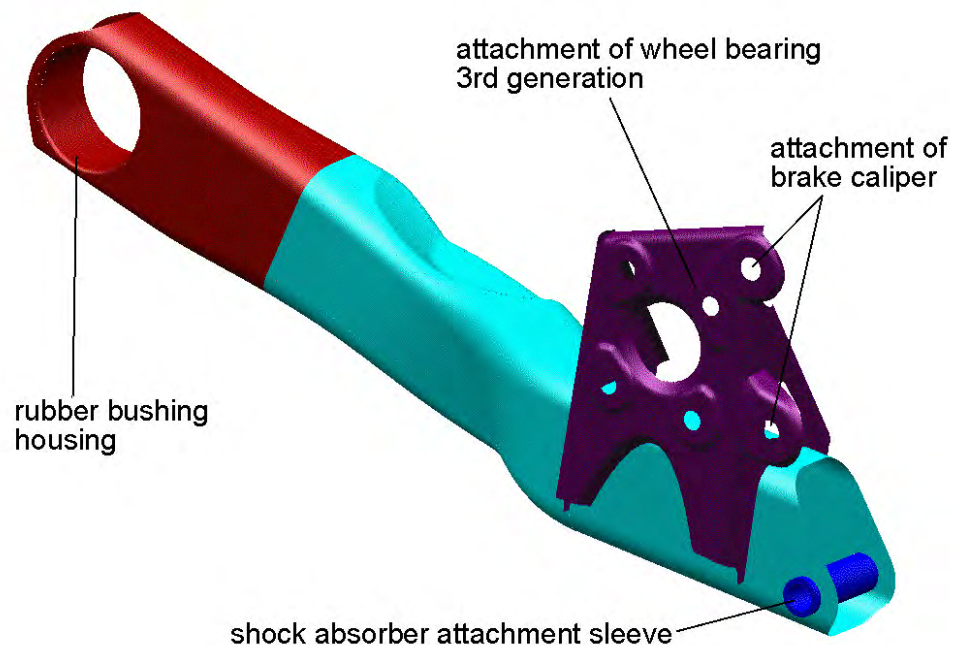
Rear suspension trailing arm weld assembly
